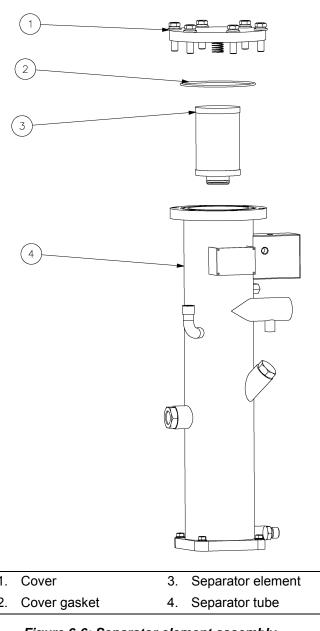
Separator element assembly— ST4, ST5, ST7
